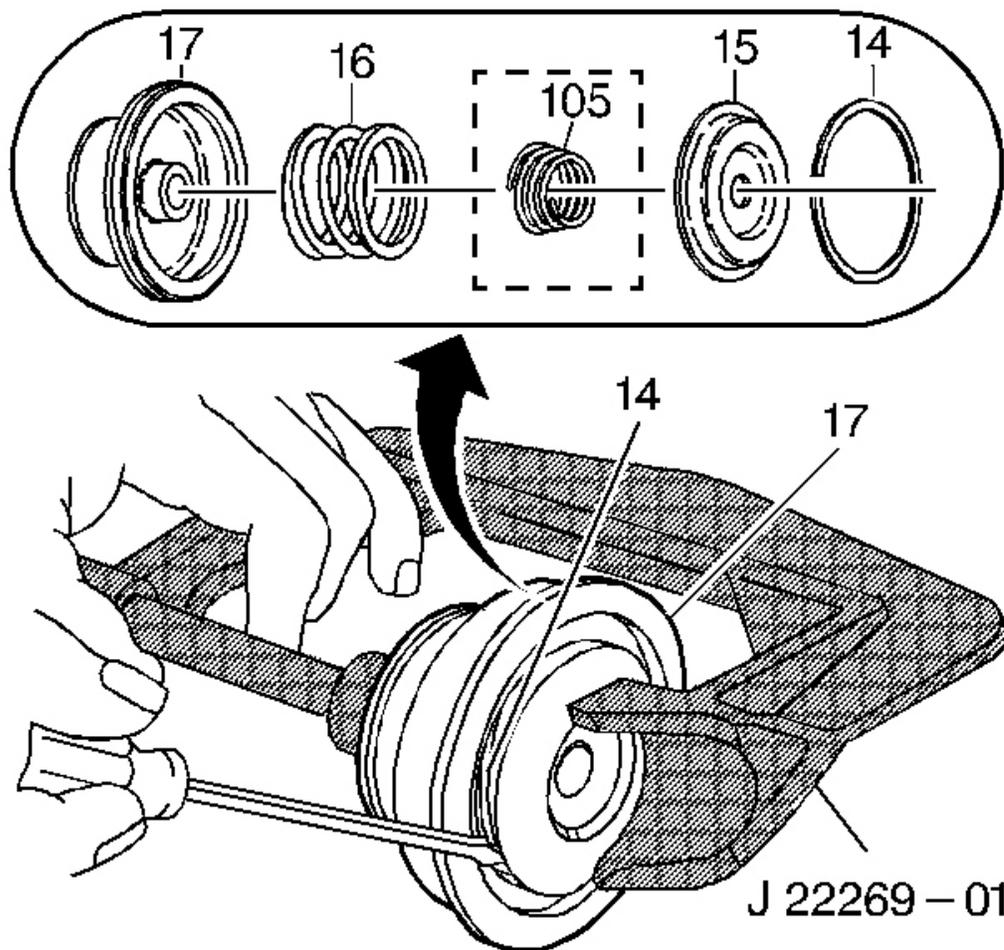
Using J 22269-01 To Compress Second Apply Piston Assembly
